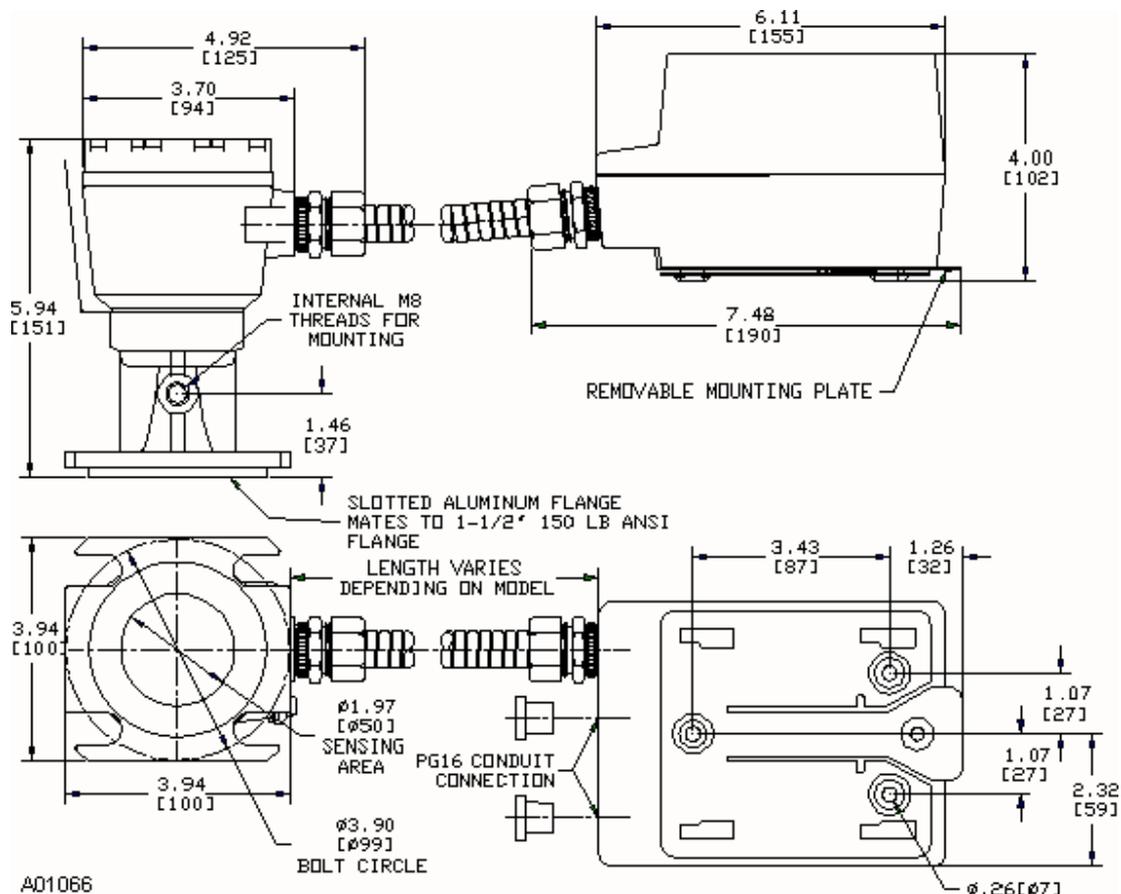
DTR 231 Remote Housing Mounting Dimensions
